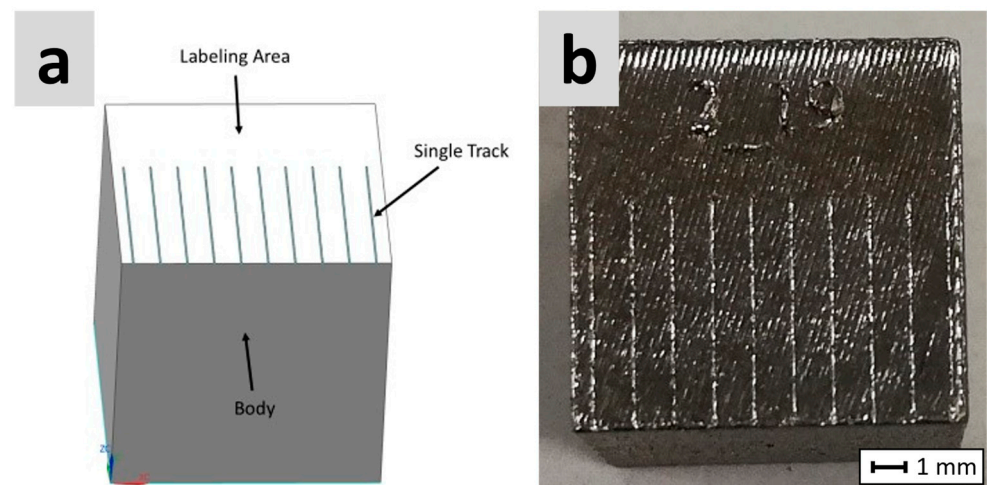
Specimen design: (a) CAD model, (b) example of the printed specimen.
